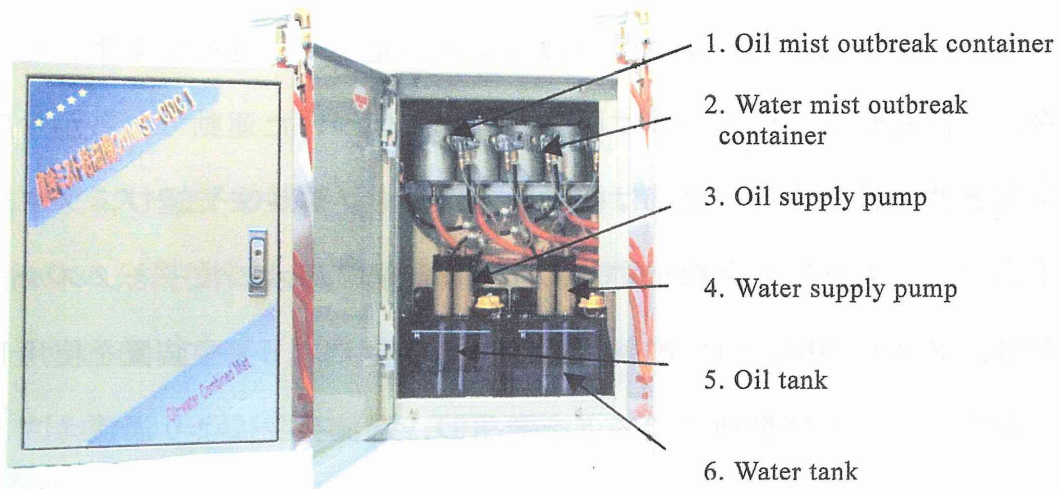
b Oil-water mist lubrication machine OWMIST-CDC I
